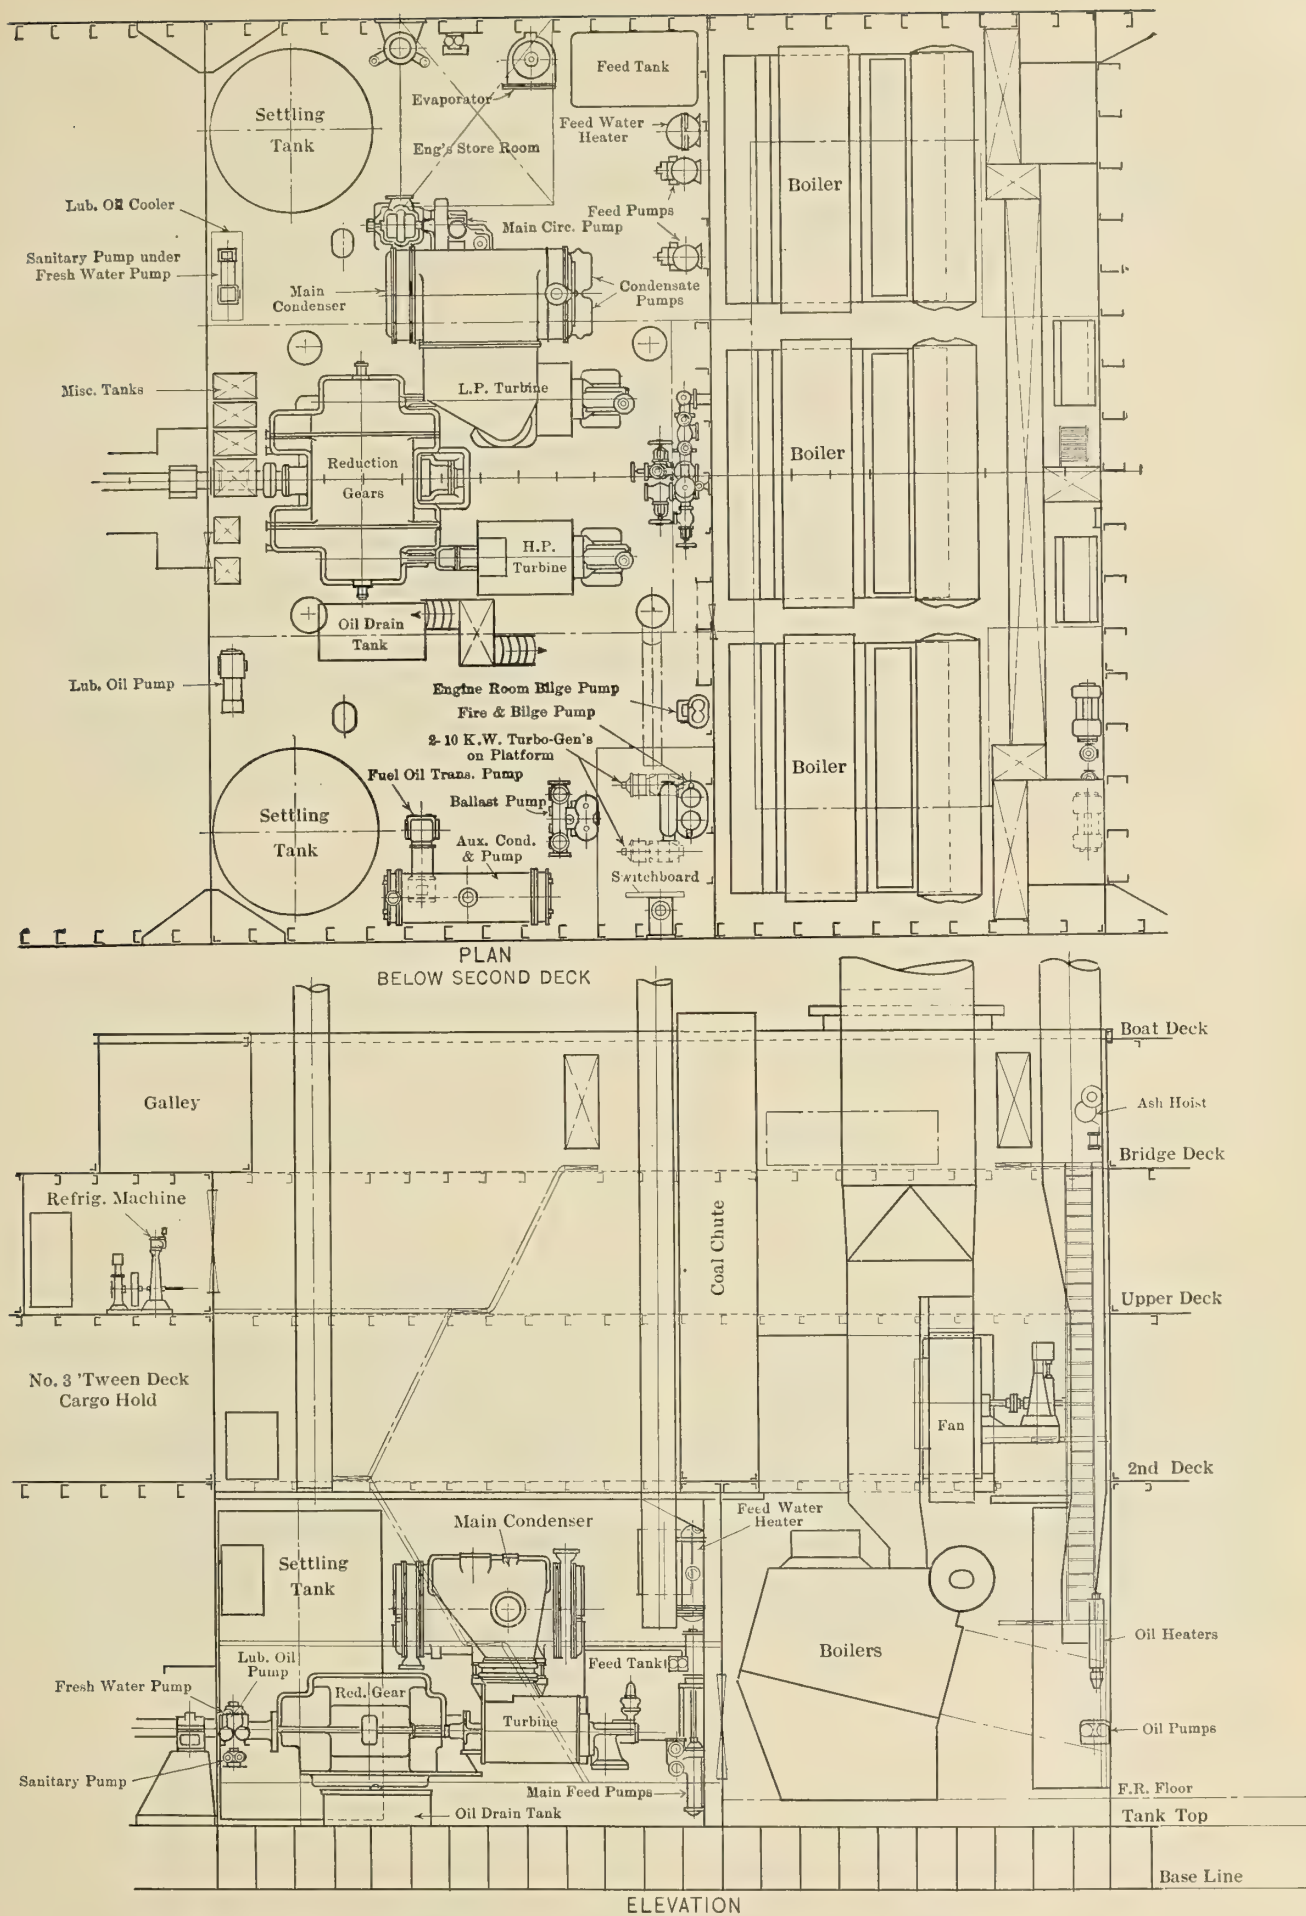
Plan and Longitudinal Section Through Machinery Space
